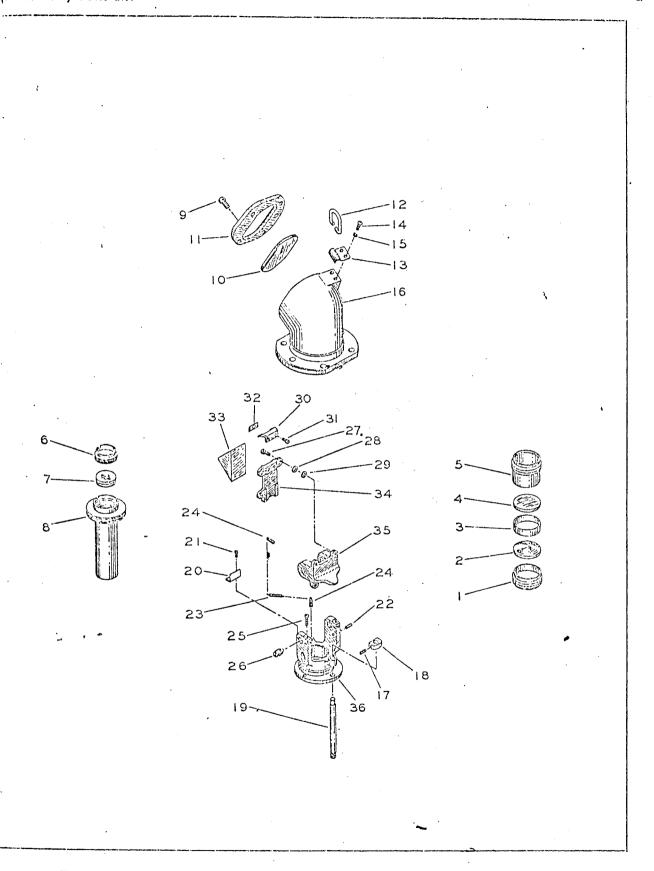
Condensor Lens Assembly, 1st and 2nd Objective Lens Assembly, Index Housing Assembly, and Index Prism Mount Assembly
